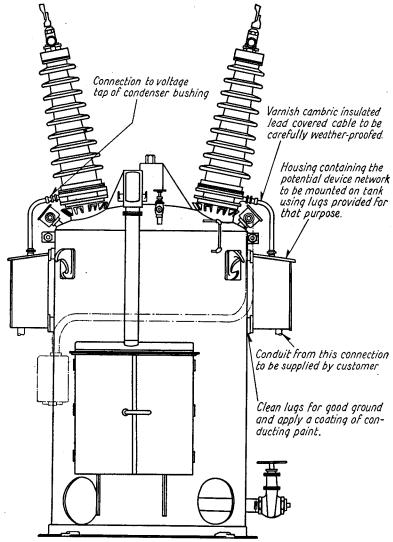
Condenser Bushing Potential Device Mounted on Breaker Tank
